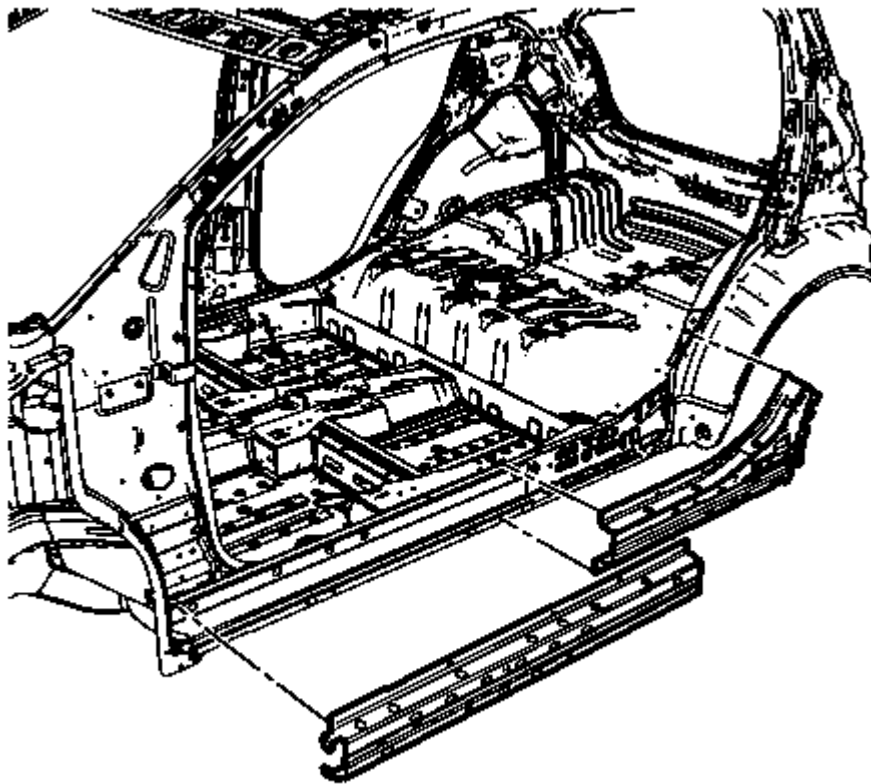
Removing Damaged Body Side Outer Panel Reinforcement
